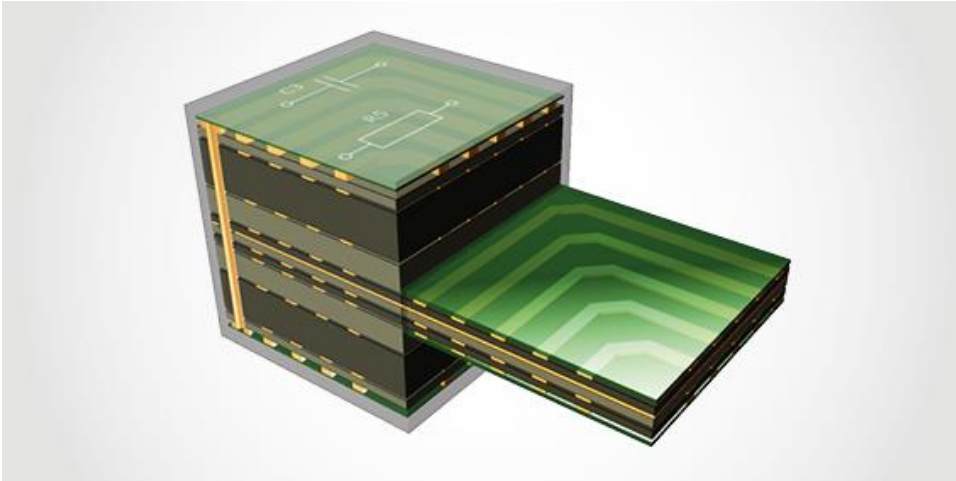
In the future, PCB layer structures will be able to be created faster and without errors in the EDA tools – here a 3Ri-4F-3Ri flex-rigid layout in Altium Designer 20. (Source: Würth Elektronik Circuit Board Technology)
